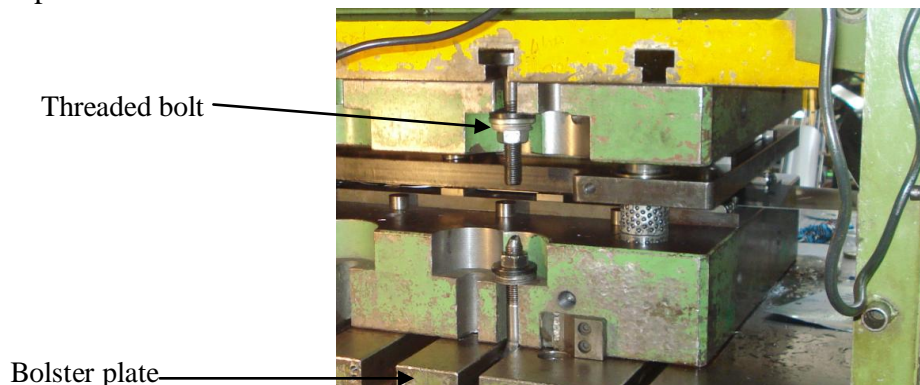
Clamping of tool die at bolster with threaded bolt [Crompton Greaves, Ahmednagar]
